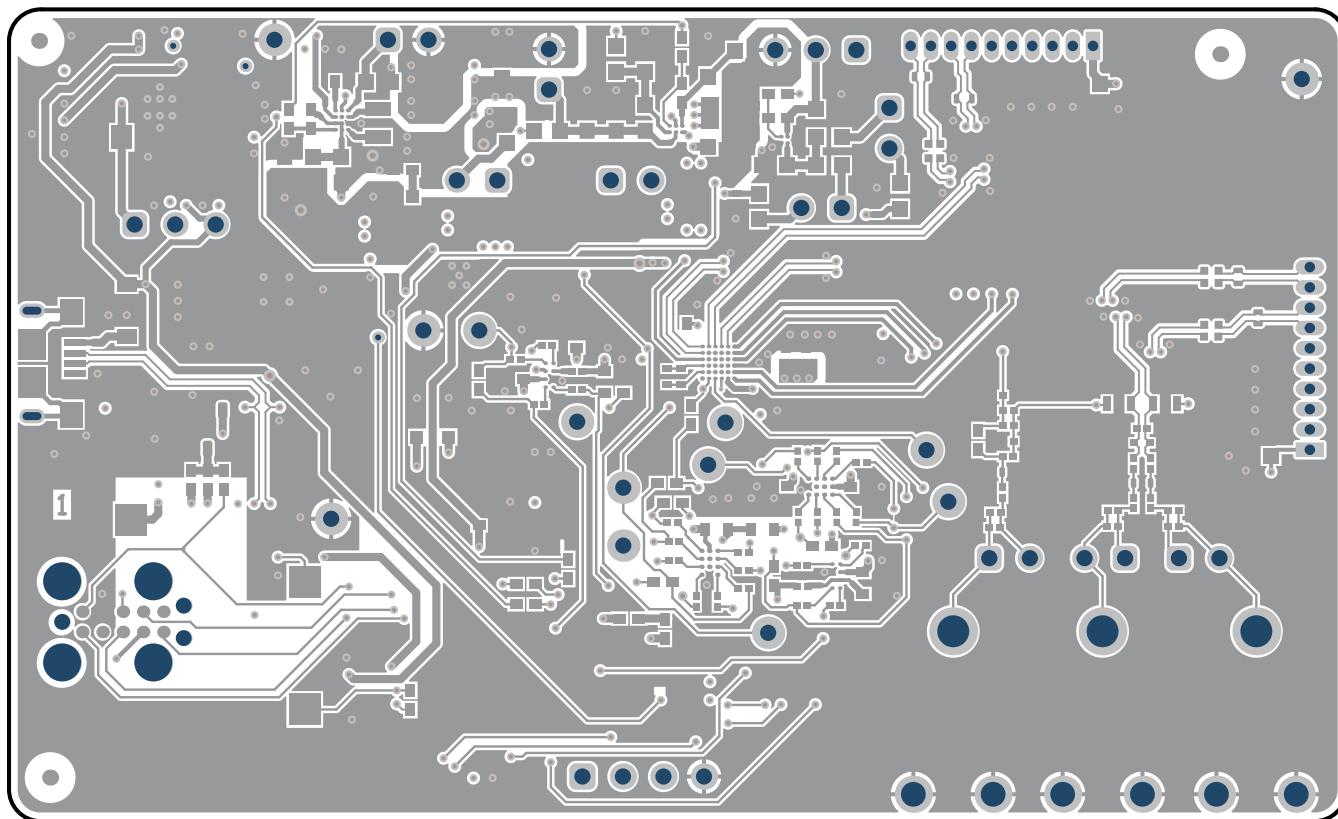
AFE4950EVM PCB Layout - Top Layer (5 of 6)
